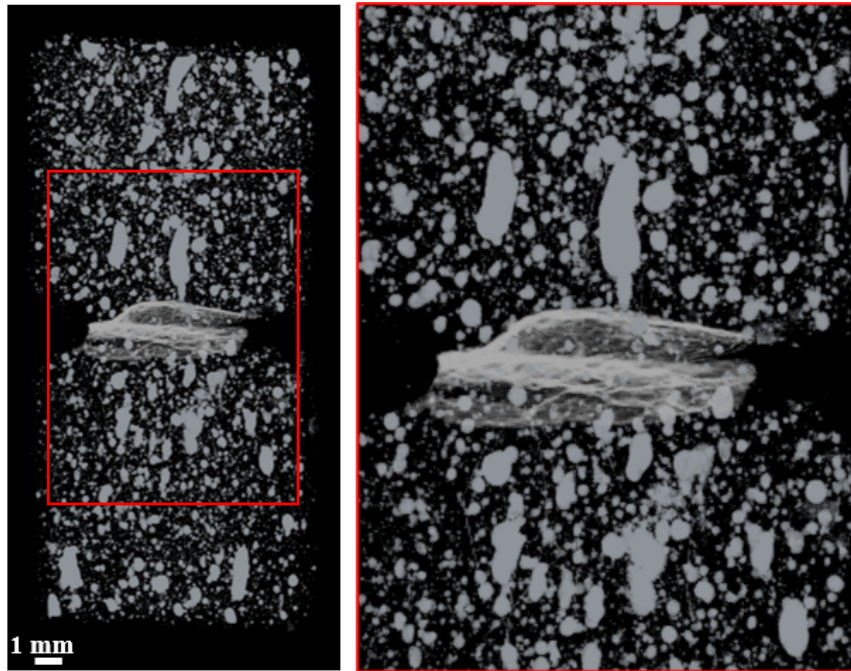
Segmented pores and crack in the tensioned specimen at loading stage 5.
